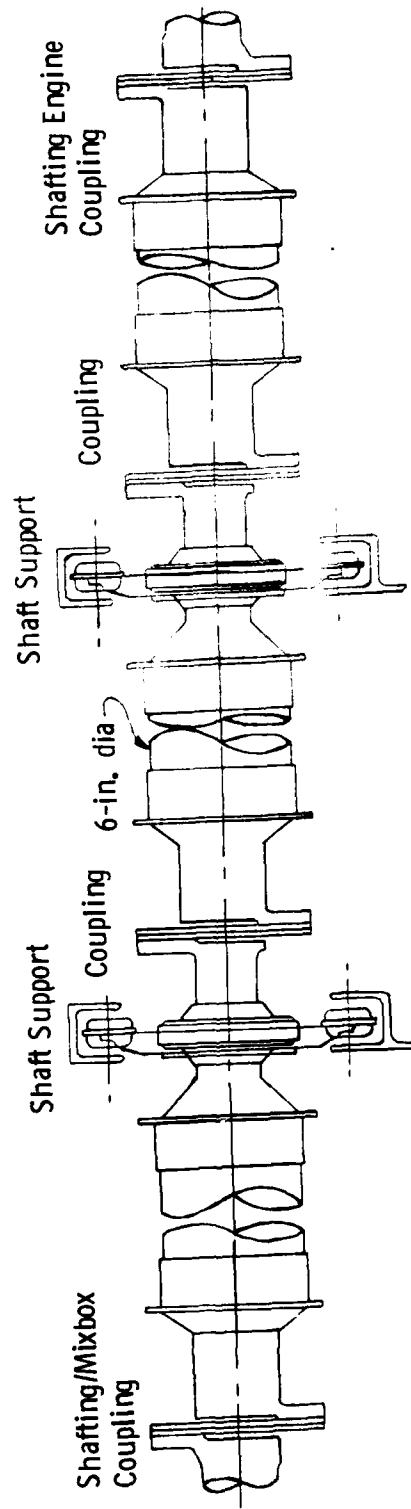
Sketch of Three-Section DST Shafting Arrangement.
